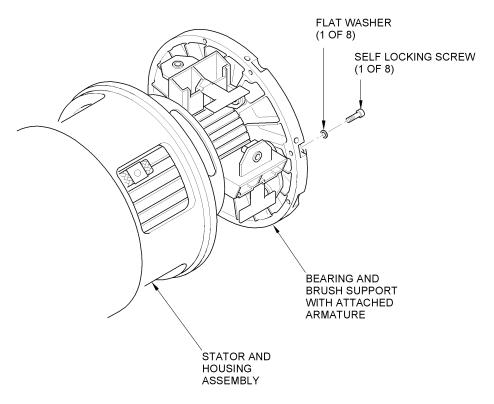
Remove the Bearing and Brush Support Assembly with Attached Armature
